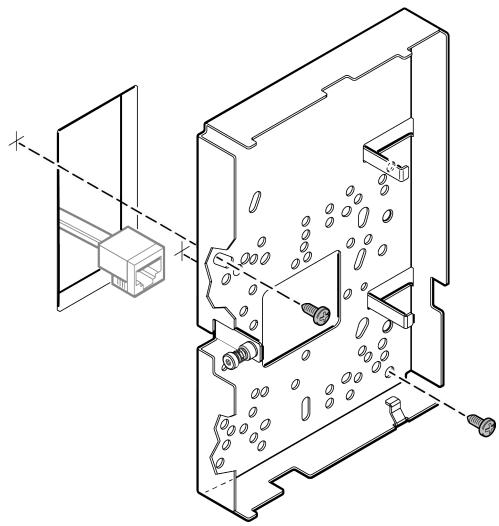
Attaching the WALL05 bracket on a wall with a hole
